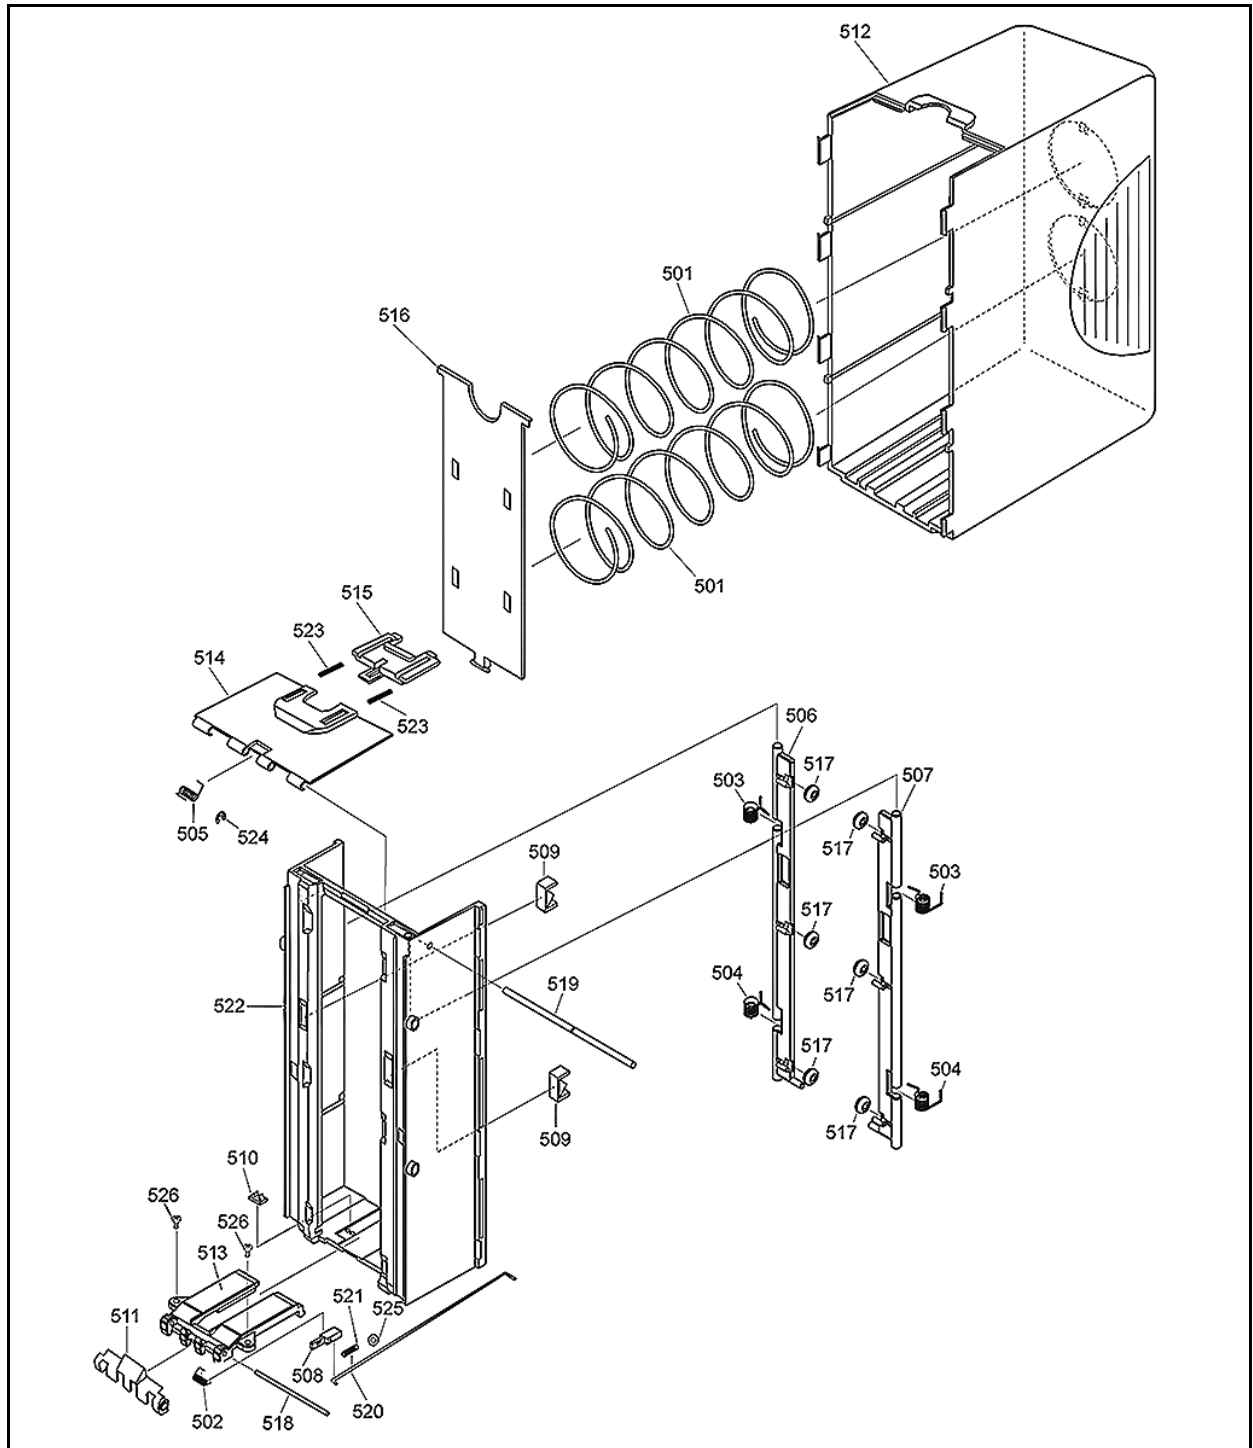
1000 Note Cash Box Assembly Exploded View
